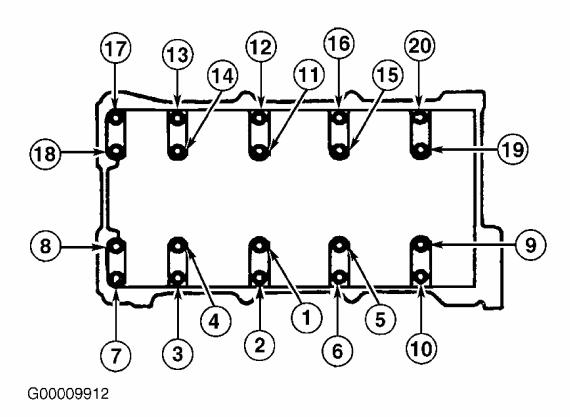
Camshaft Bearing Cap Bolt Tightening Sequence (Miata) Courtesy of MAZDA MOTOR CORP.
